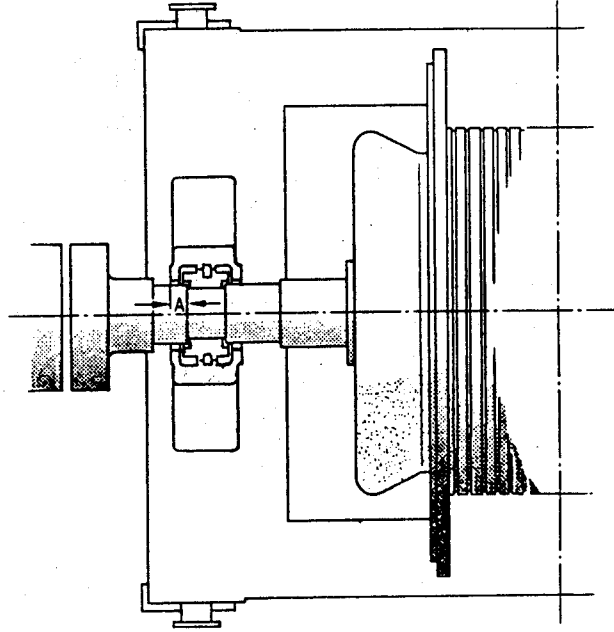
Determining the assembled position of the shaft relative to the bearing pedestal
